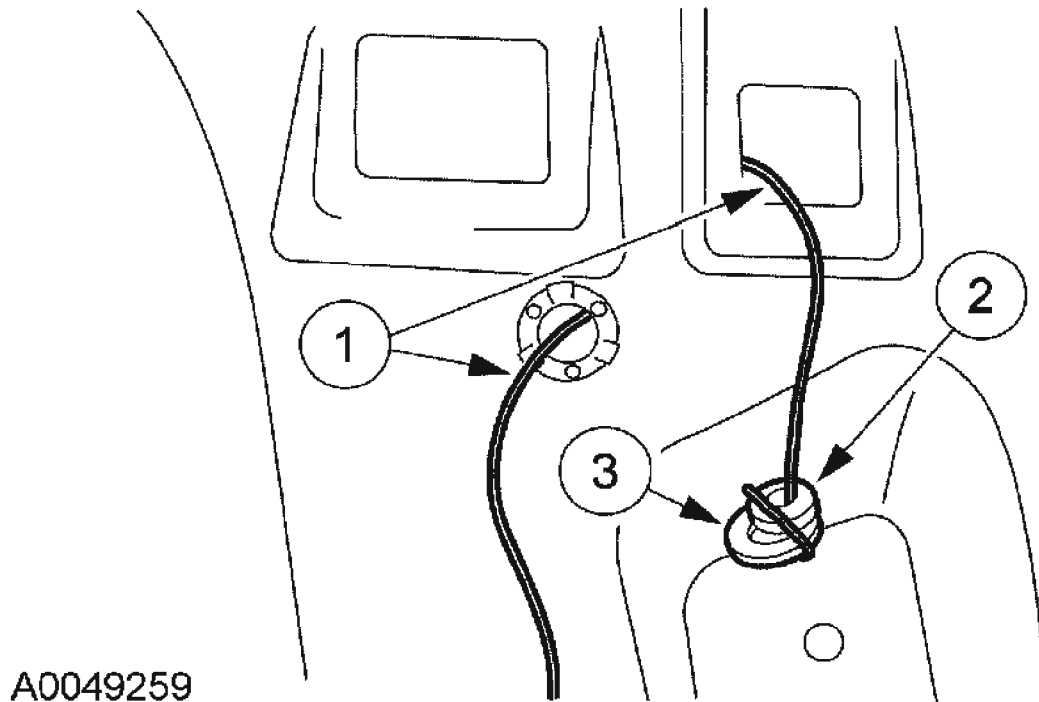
Setting Up For Positioning Of Weld Nut
